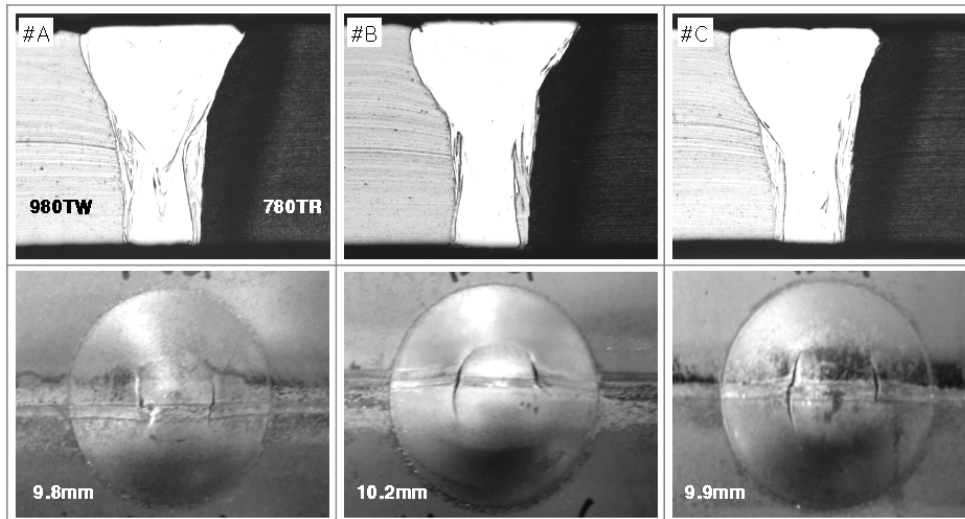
Methods of controlling weld metal microstructure for laser welded 980TW/780TR joint using Y309L filler wire
